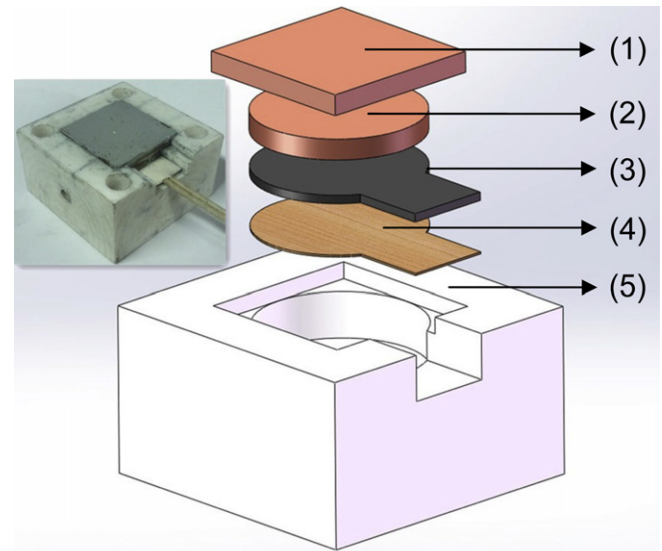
Schematic diagram of the components of the heating unit with the inset photograph showing the assembly. The components are: (1) heat spreader, (2) round copper plate, (3) mica heater, (4) insulation pad, and (5) packaging.
